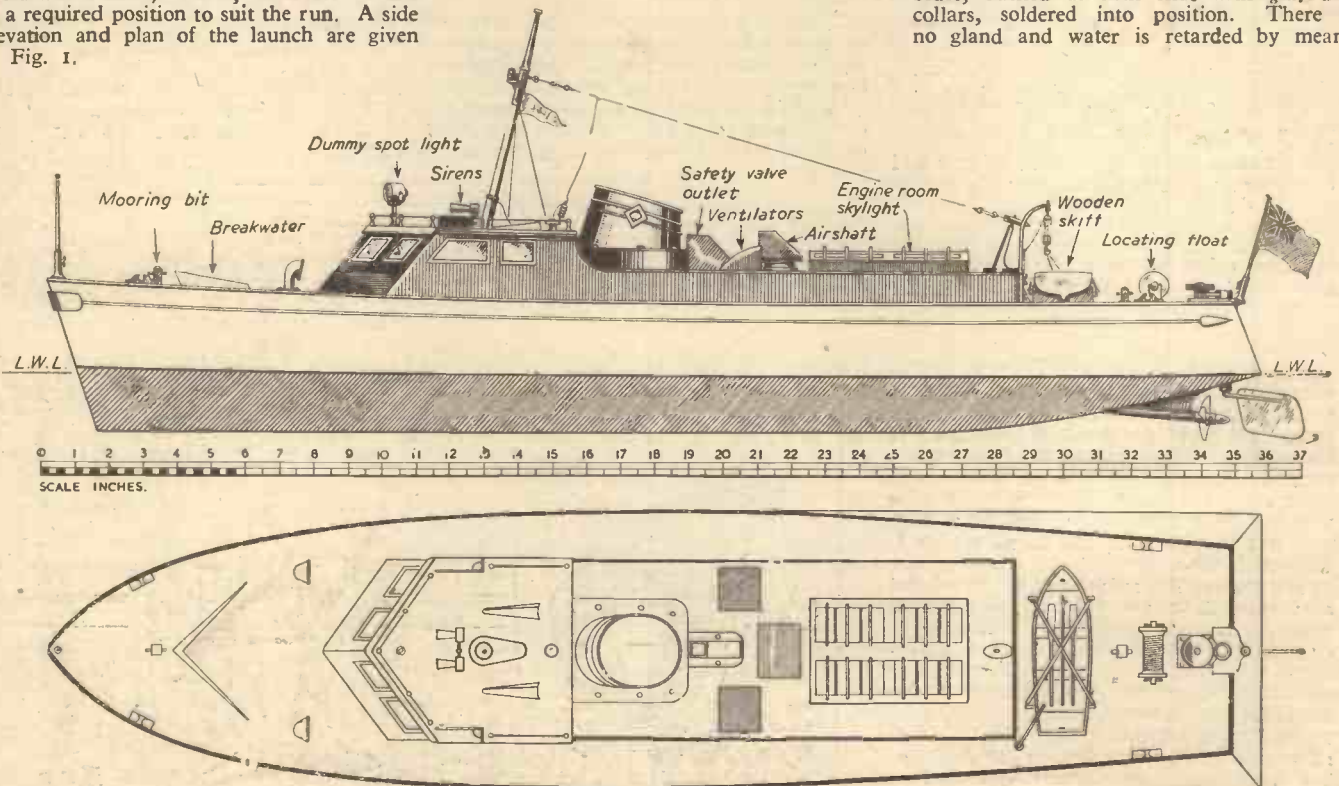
Side elevation and plan of the model steam launch "Vanessa."
